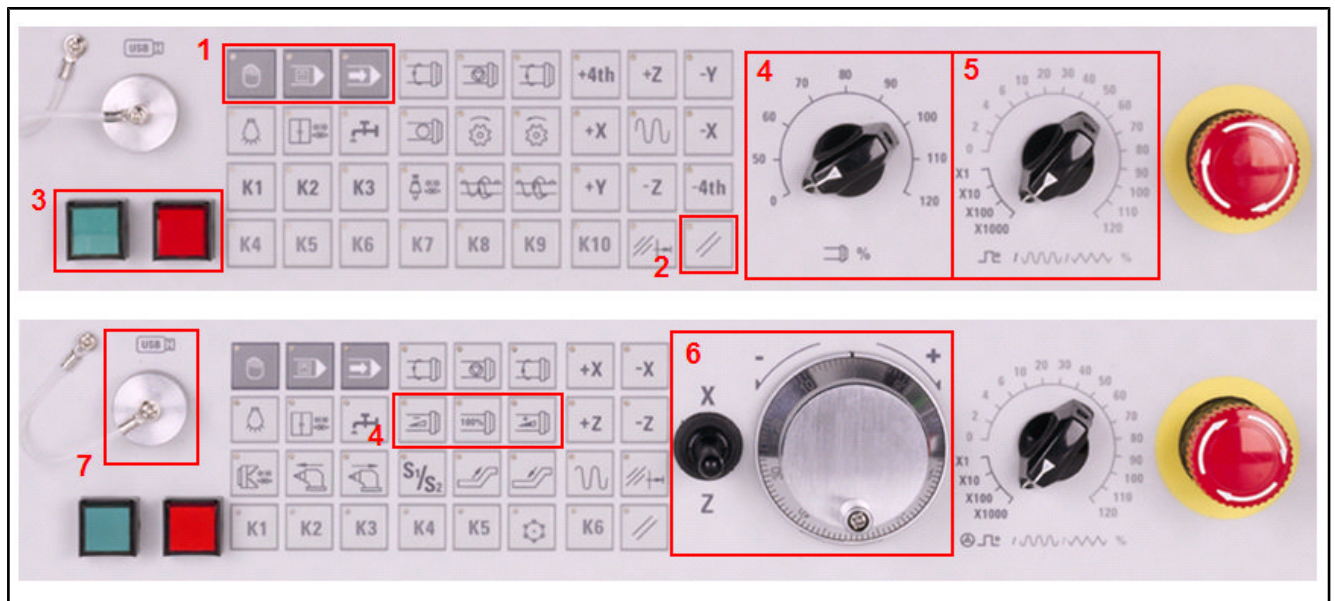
Milling (top) and turning (bottom) machine control panels
